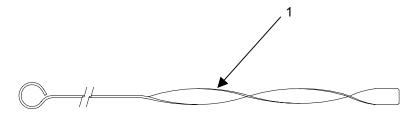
Group 10 Burner Reamer Tool 0035 00-(1 Blank)/2
